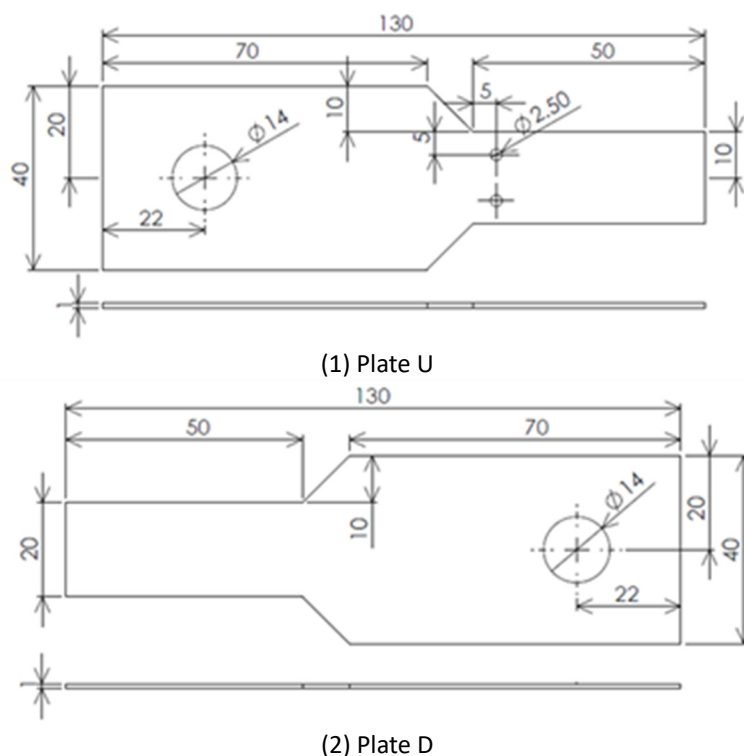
Dimensions and configurations of plates composing the bolted joint specimen
